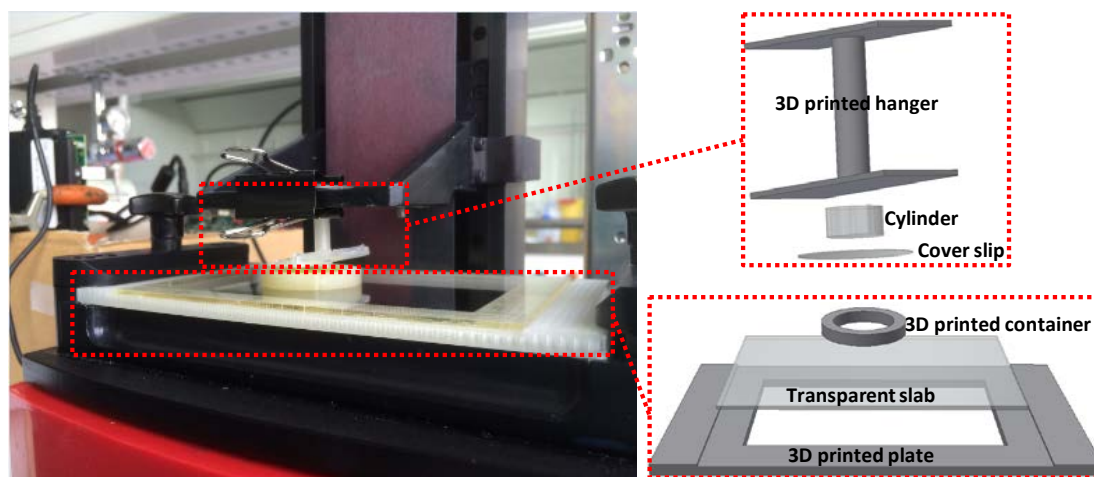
A photography of the modified commercial printer and a schematic diagram showing how the home-made vat and fabrication platform were built and assembled.
